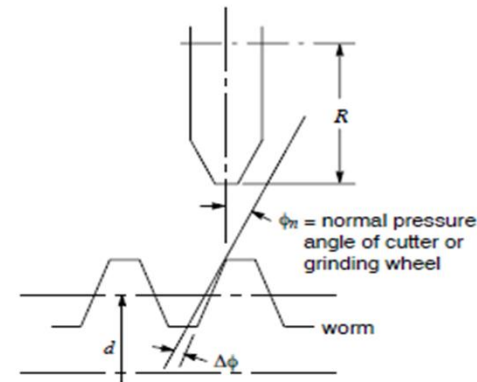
Reduction in thread angle from the cutter or grinding wheel angle - Form ZK
